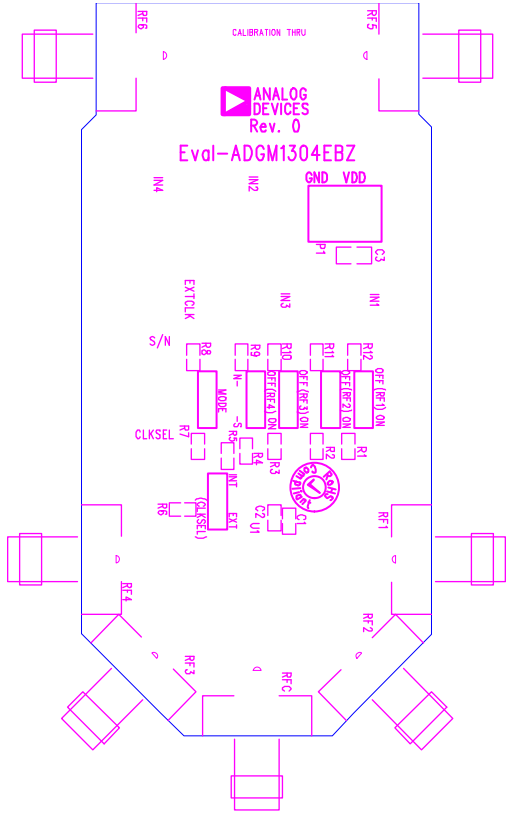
EVAL-ADGM1304EBZ Component Side Silkscreen PCB Drawing (Top)
